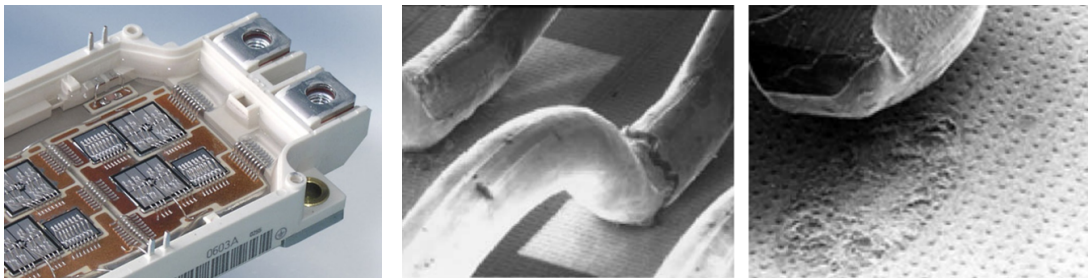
Power semiconductor module, a cracked bond wire, and solder fatigue
